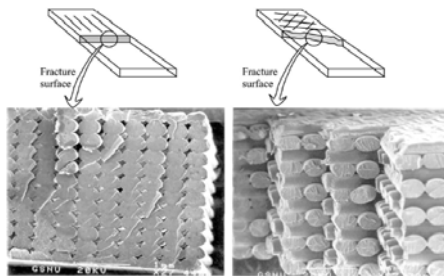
Fracture surfaces of  $[0^\circ]_{12}$  and  $[45^\circ/-45^\circ]_6$  specimen [4]
